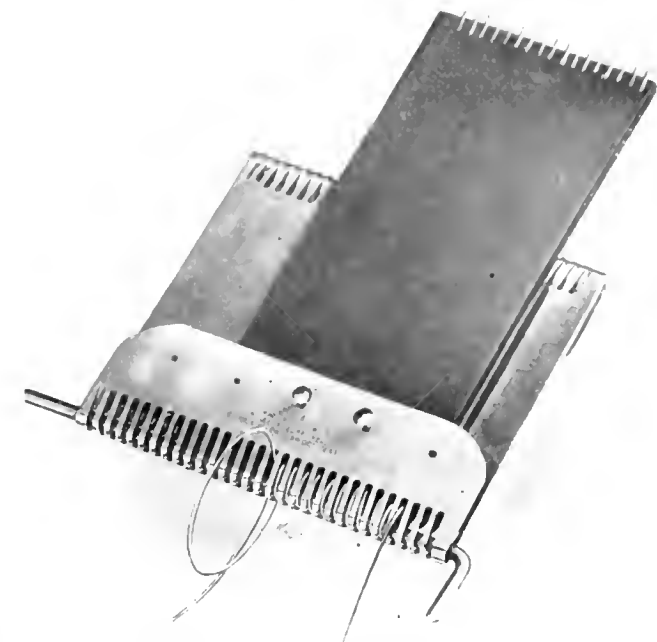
An Inexpensive Tool for Inserting Wire Belt Lacing
